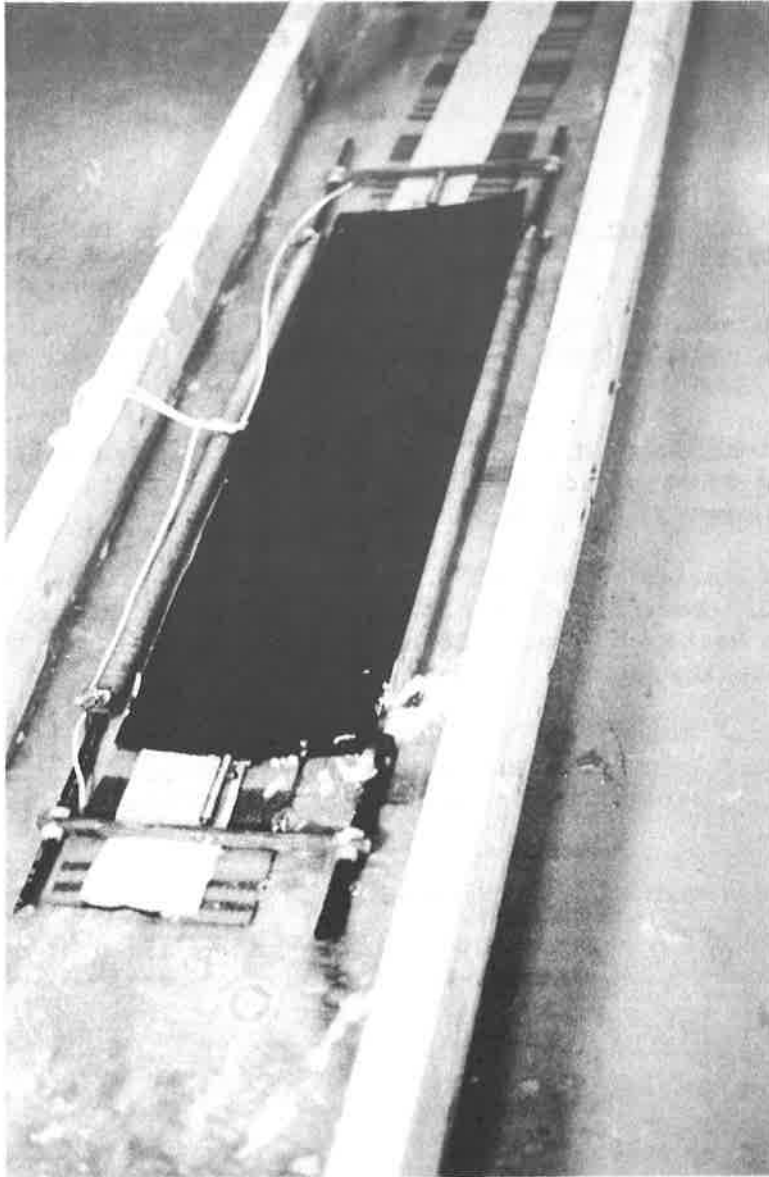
Underwater Electrical Conduction Welding of Geomembrane Sheet
